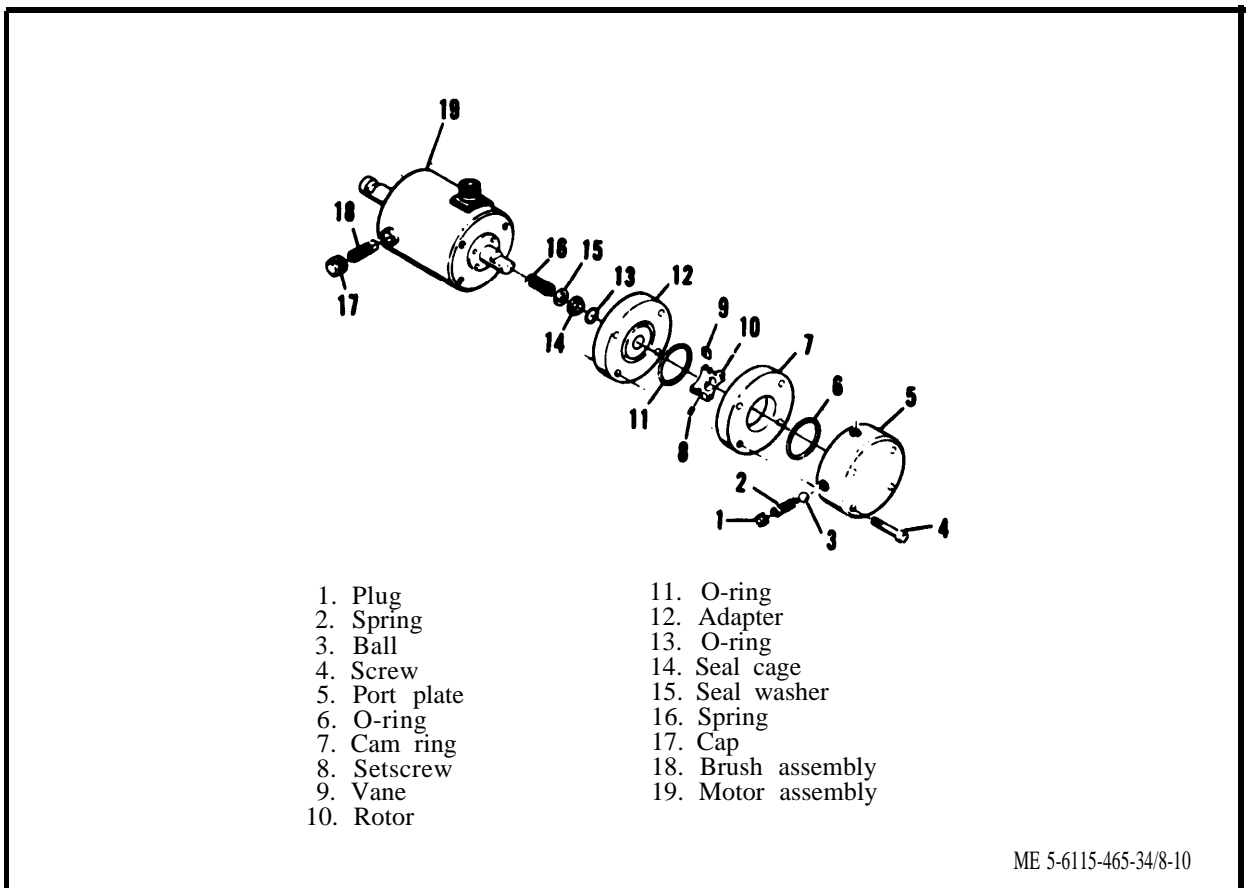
Coolant Pump and Motor Assembly, Exploded View
